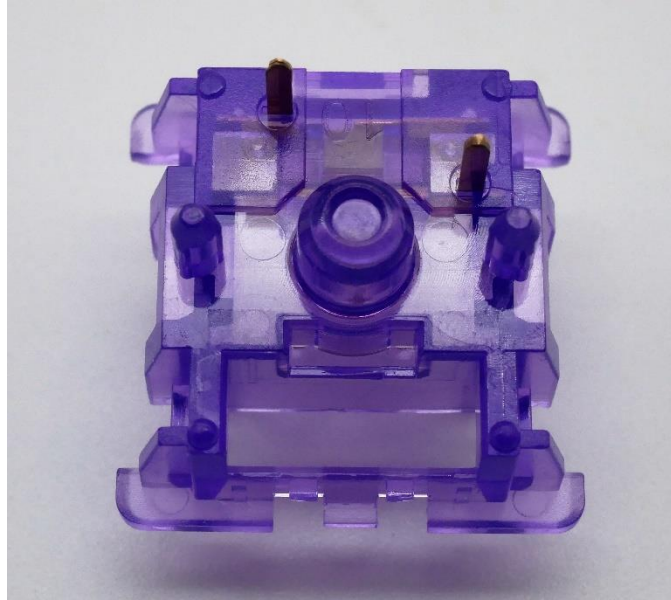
TKC Blackberry top housing internal design showing identical mold markings to those of previously released Tecsee switches.
